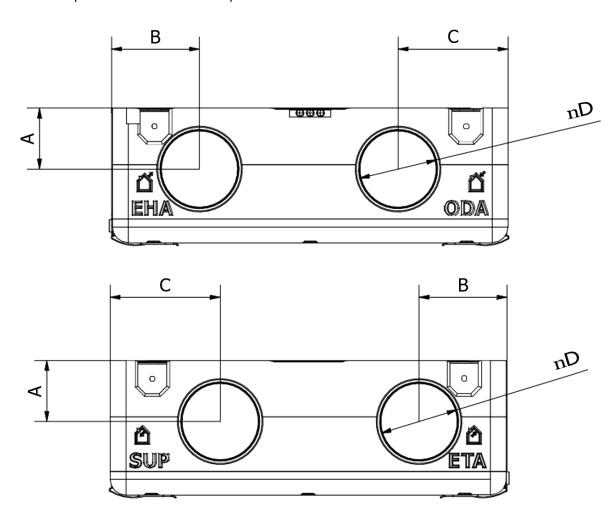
Dimensions of nozzles for assembly taking into account the space for insulation
